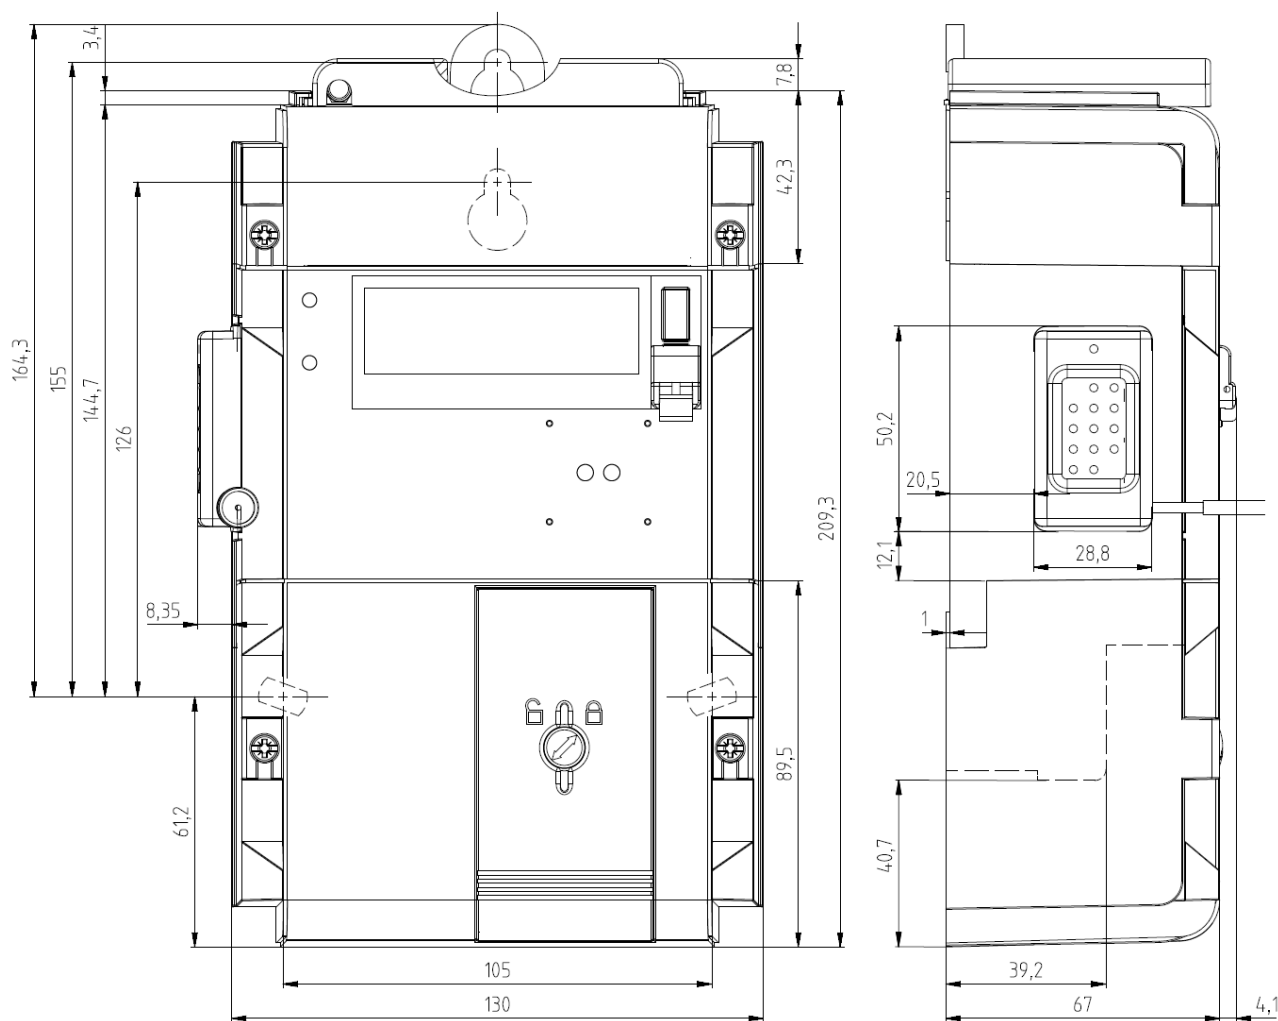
Dimensions of the single-phase meter, standard terminal cover (in mm)
